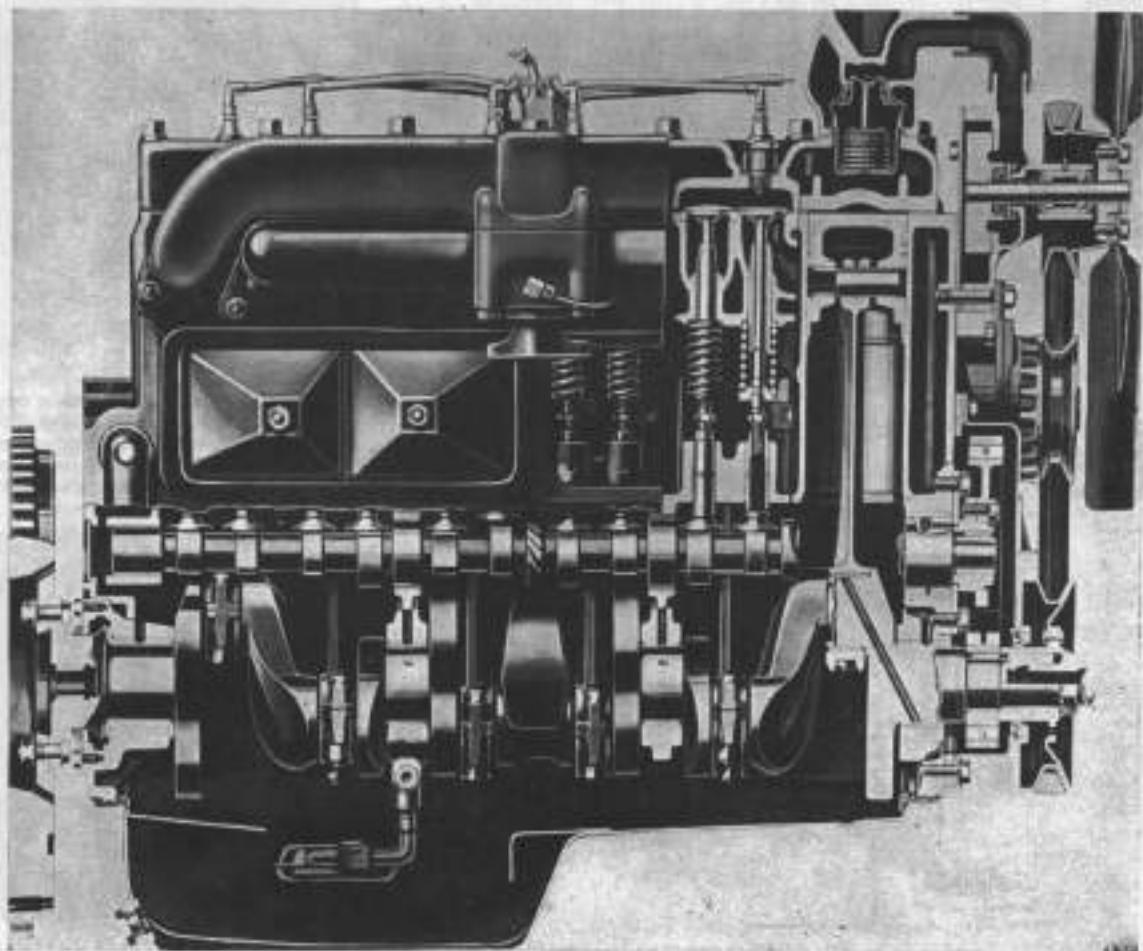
Chrysler 6 cylinder engine cross section side view.
